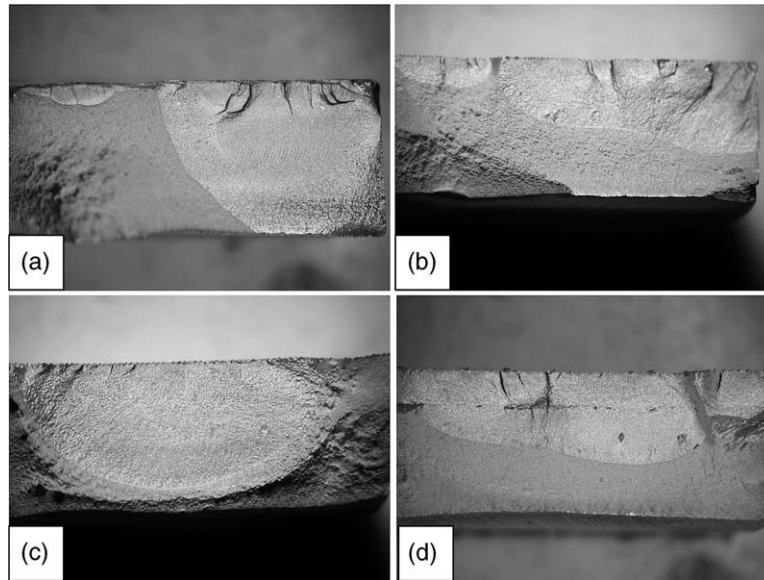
Representative macrographs of the fracture surfaces of as-welded specimens: (a) 80, (b) 95, (c) 130, (d) 200 mm/min. Crack initiation sites are always on the upper surface in the pictures.
